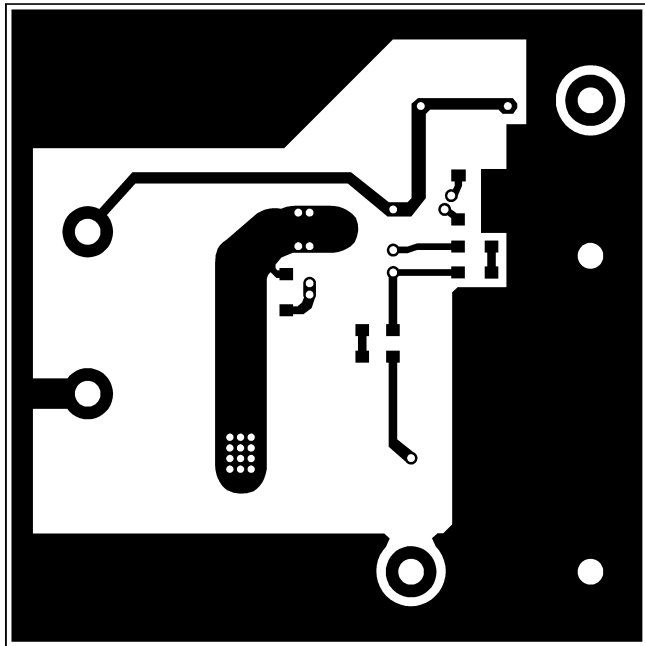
LM2650 Evaluation Board Solder Side (Scale 1:1)
